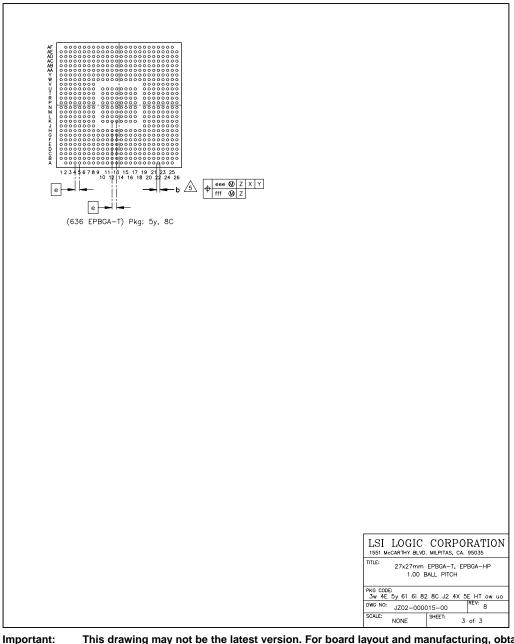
472-Pin EPBGA-T (UO) Mechanical Drawing (Sheet 3 of 3) (Cont.)
